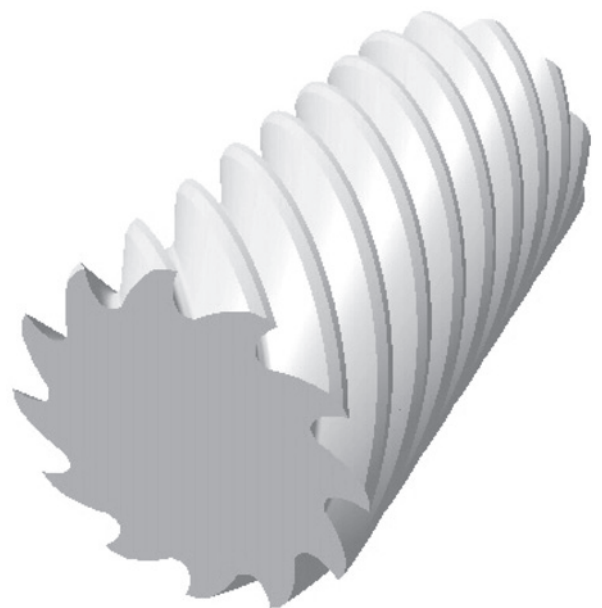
Solid modelling of the right-hand helical cutting tool
